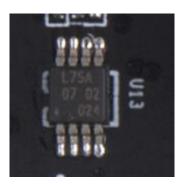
LM75 sensor on the AX7Z010 carrier board
